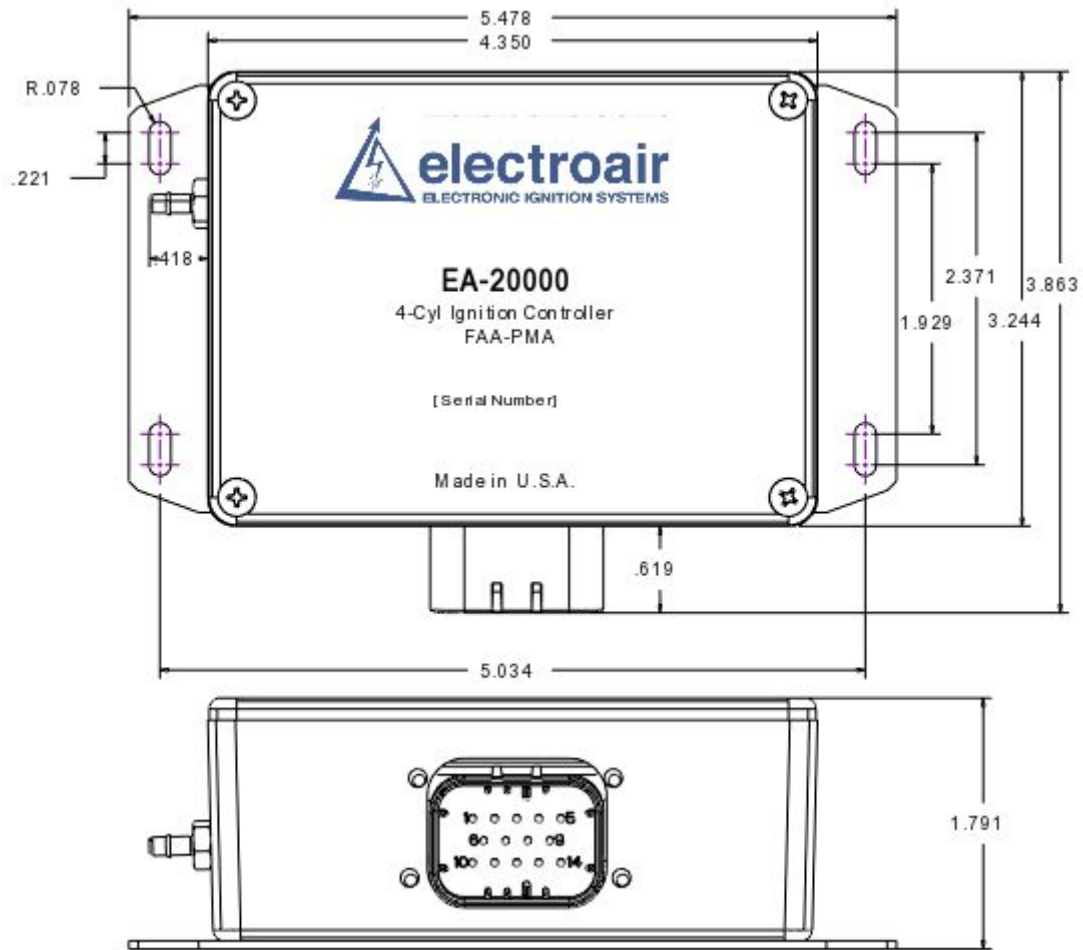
P/N EA-20000 Overall and Hole Dimensions
